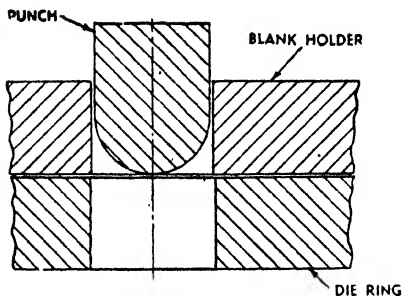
A drawn part made with a punch of hemispherical shape (the end of which hits the blank far from the die) tends to produce a part with a wrinkled bottom.
